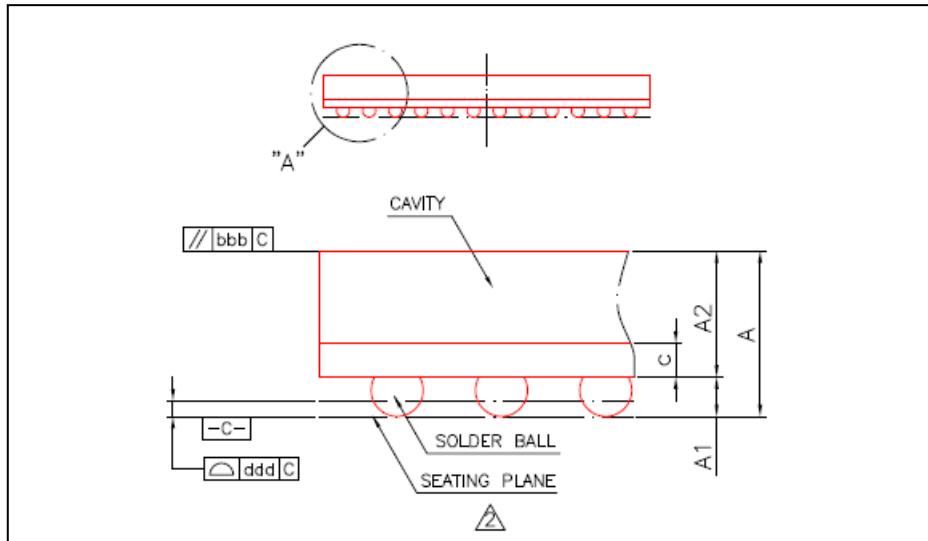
RK616 TFBGA(HF) Package Side View
